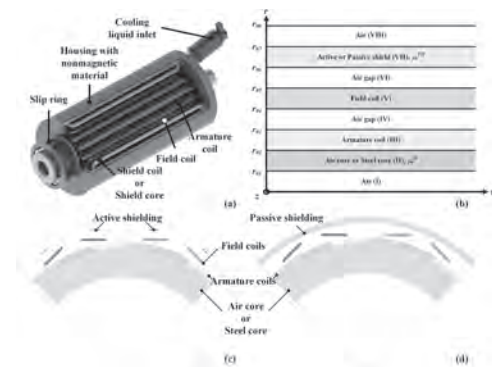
SC machine: (a) structure, (b) analytical model, (c) actively shielded SC machine, and (d) passively shielded SC machine according to core materials.
